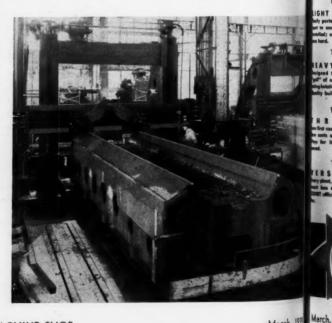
Planing the bed ways of a base plate casting for 3,500 - ton extrusion press.
